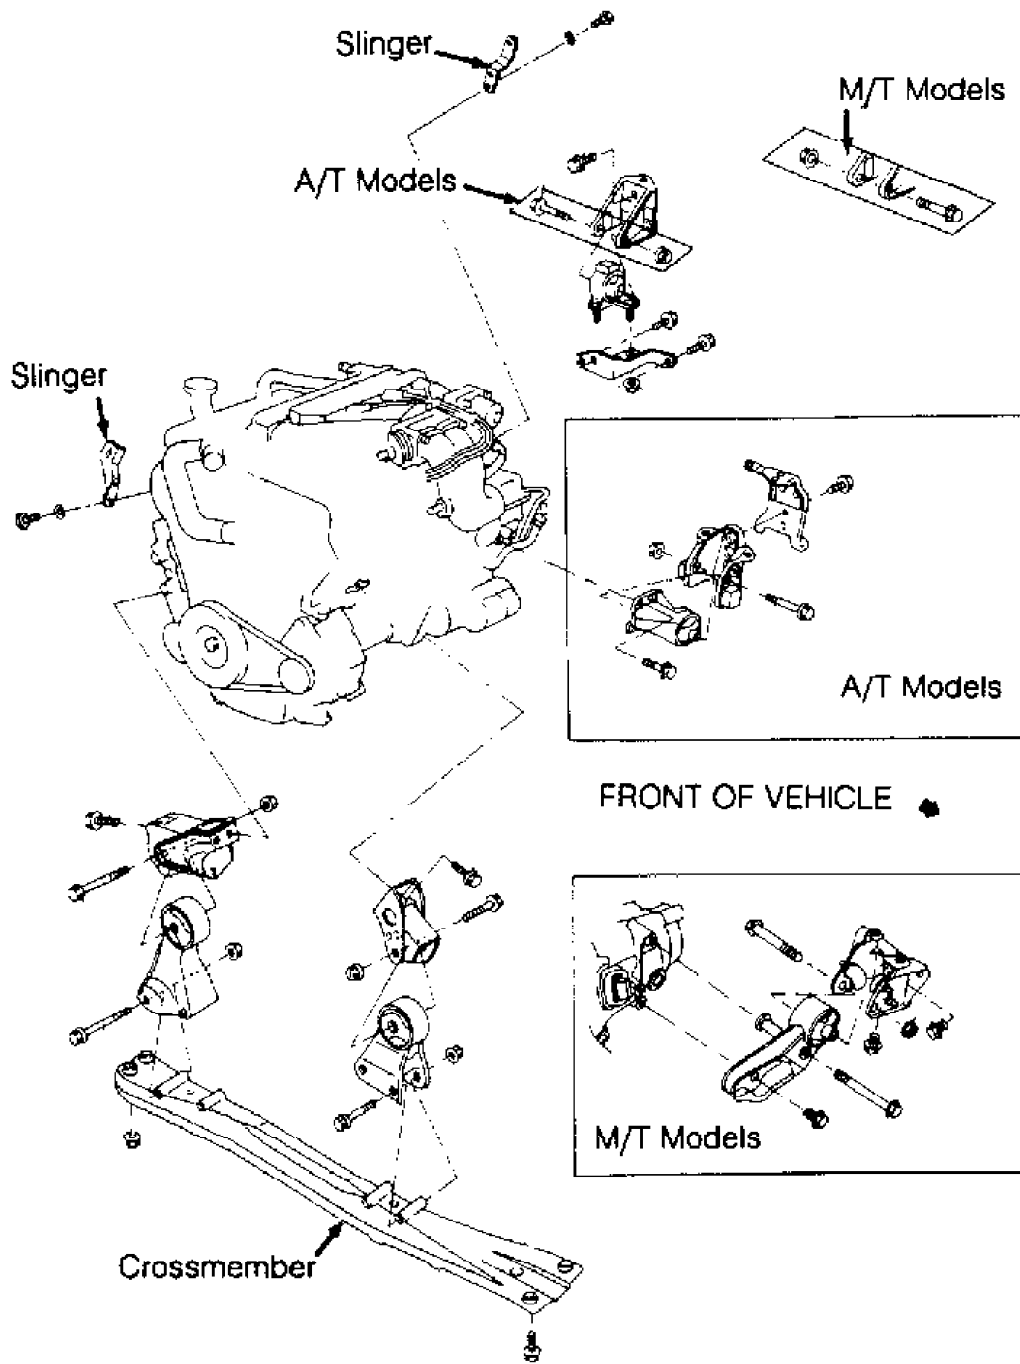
Removing & Installing Engine Assembly (Maxima)
